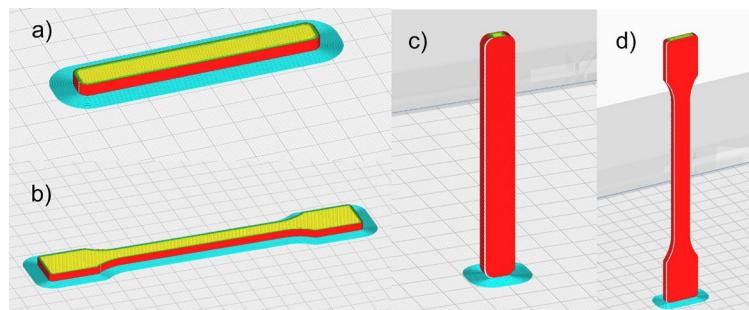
Specimen orientation: a) bending and Izod test VI; b) tensile test VI; c) bending and Izod test V⊥; d) tensile
